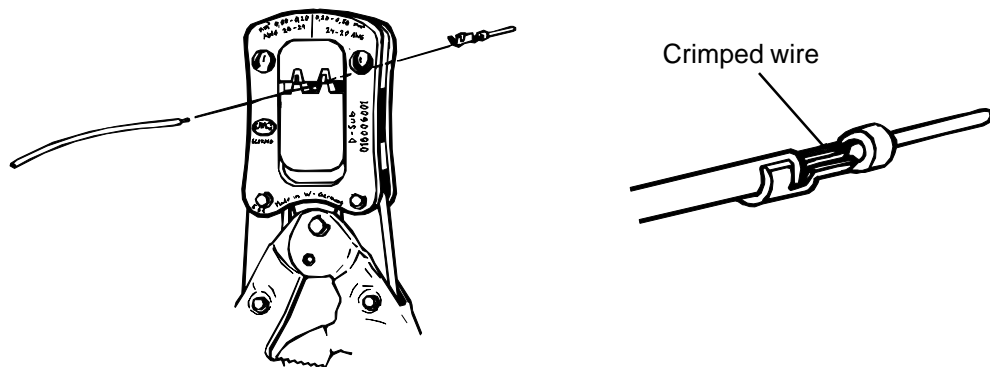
Crimping a wire (crimp tool LSD 319 11).
